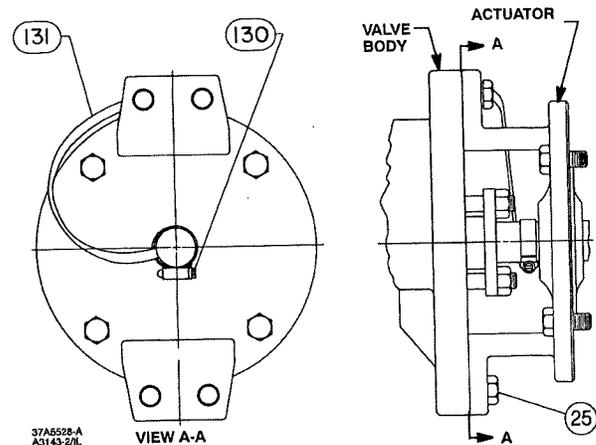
Optional Shaft-to-Body Bonding Strap Assembly
